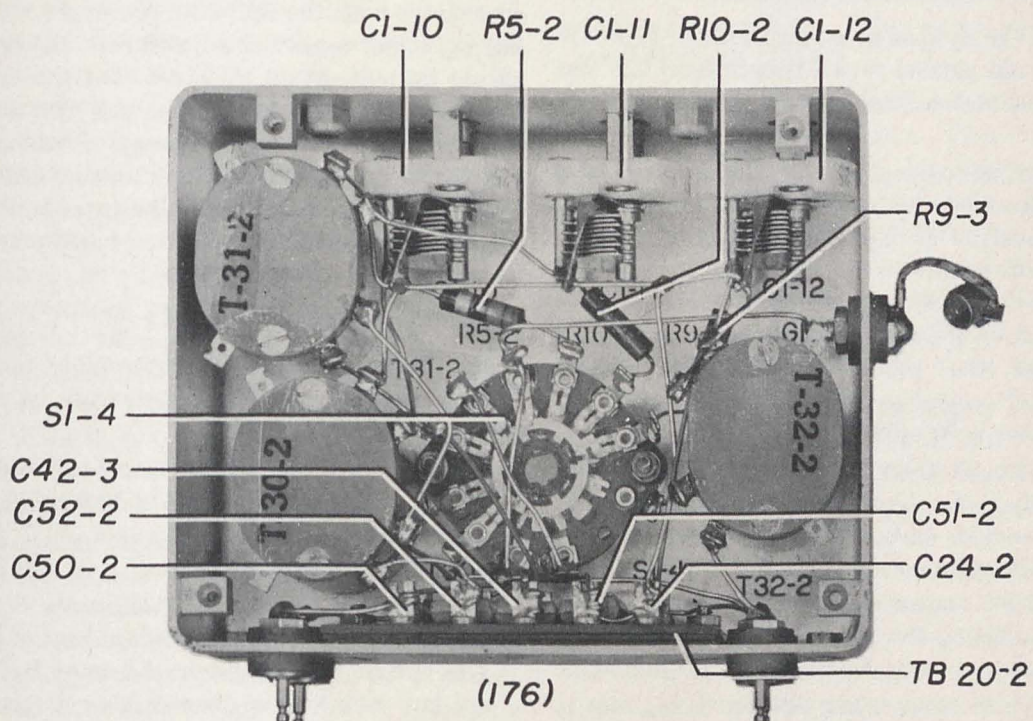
RADIO COMPASS UNIT BC-443-A, 2ND RF TUNING ASSEMBLY 176
